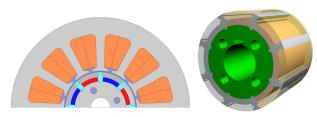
2D cross section shape and rotor assembly shape of suggested PMSM model
